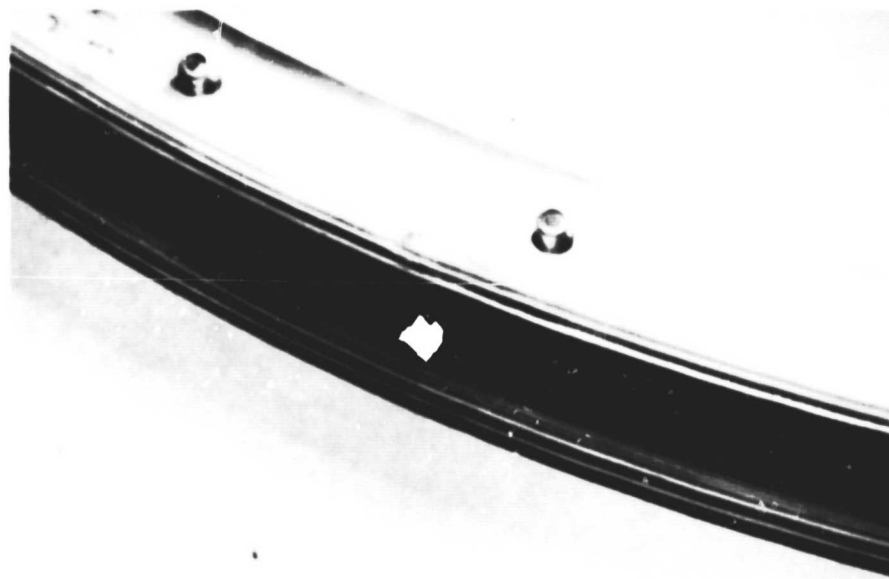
3.0-Bleed Seal at 4:00 O'Clock Position Showing a Torn Rear Seal. (80-444-0372-0)
